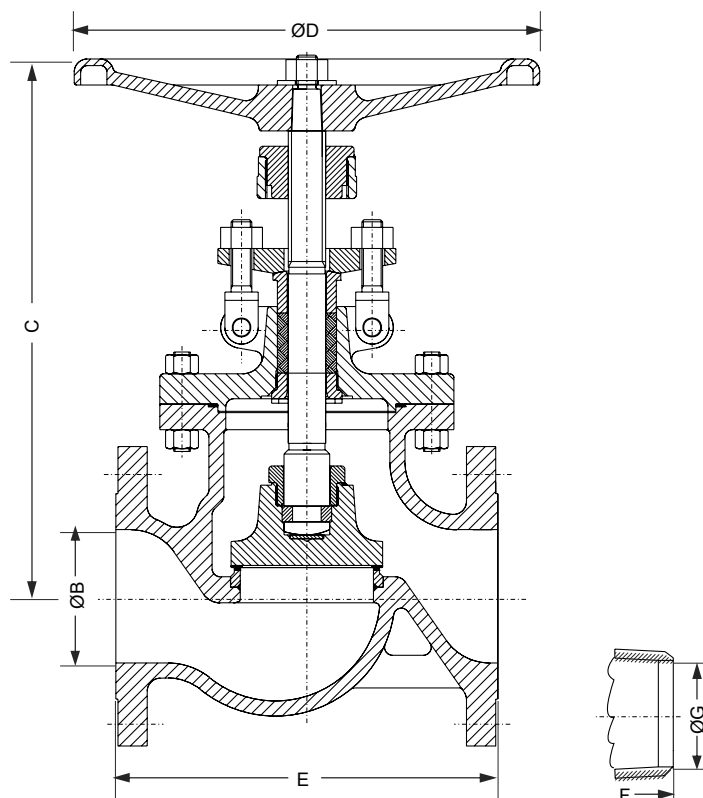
Sectional drawing of SICCA 150-600 GLC
